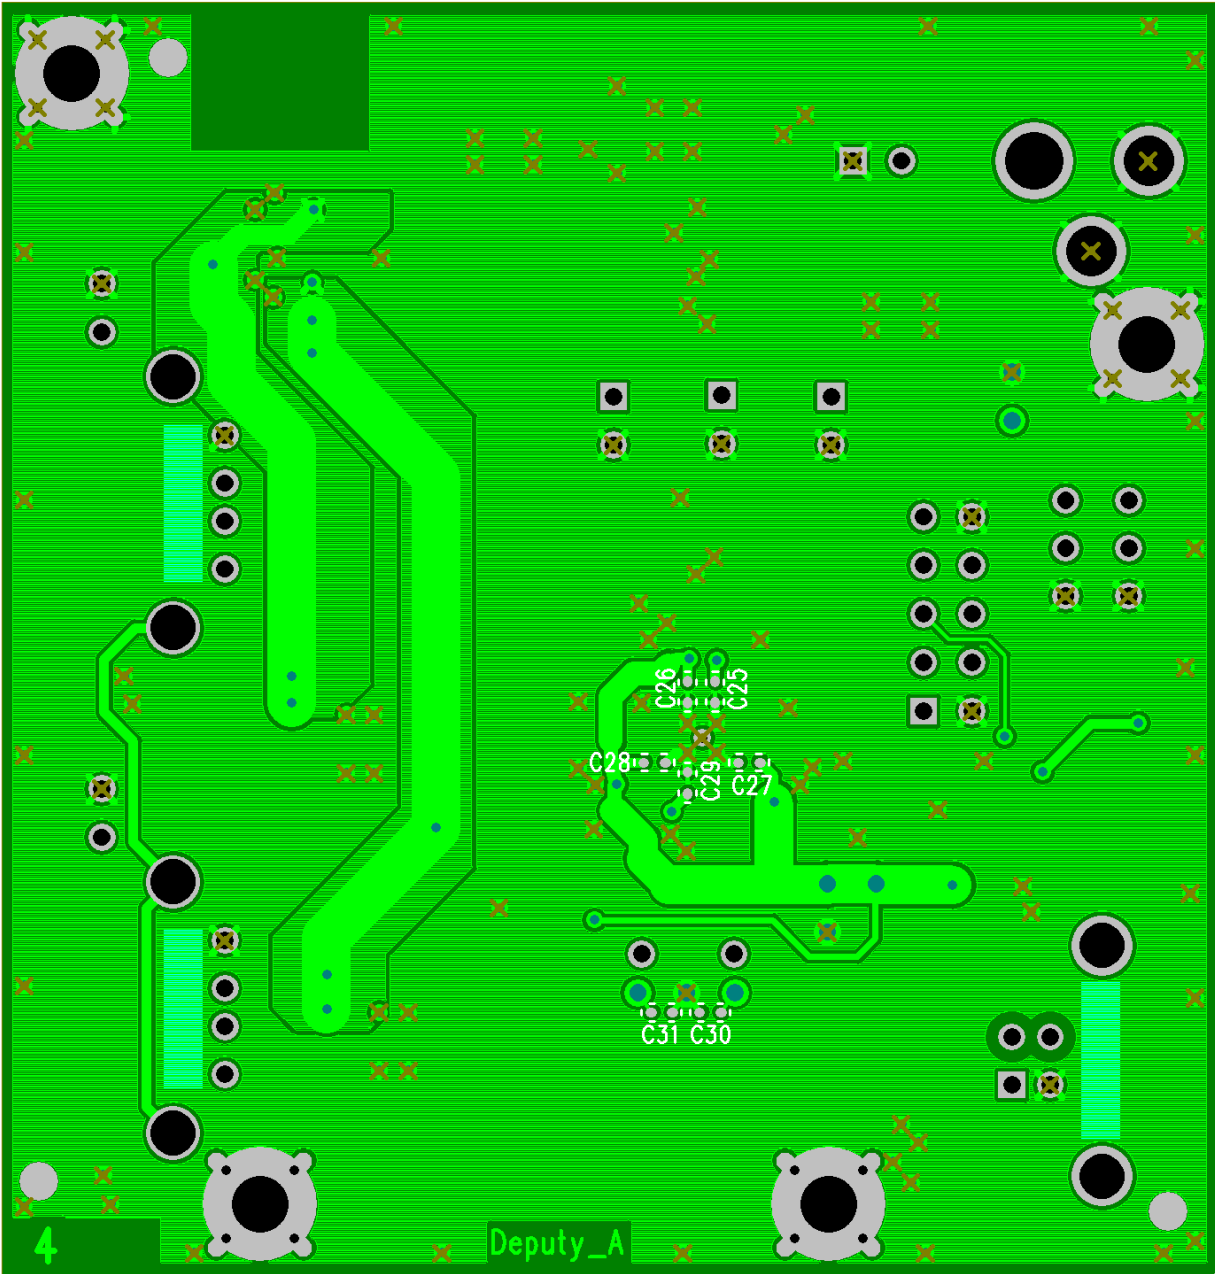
EVB-USB2422 Bottom Layer - Solder Side
